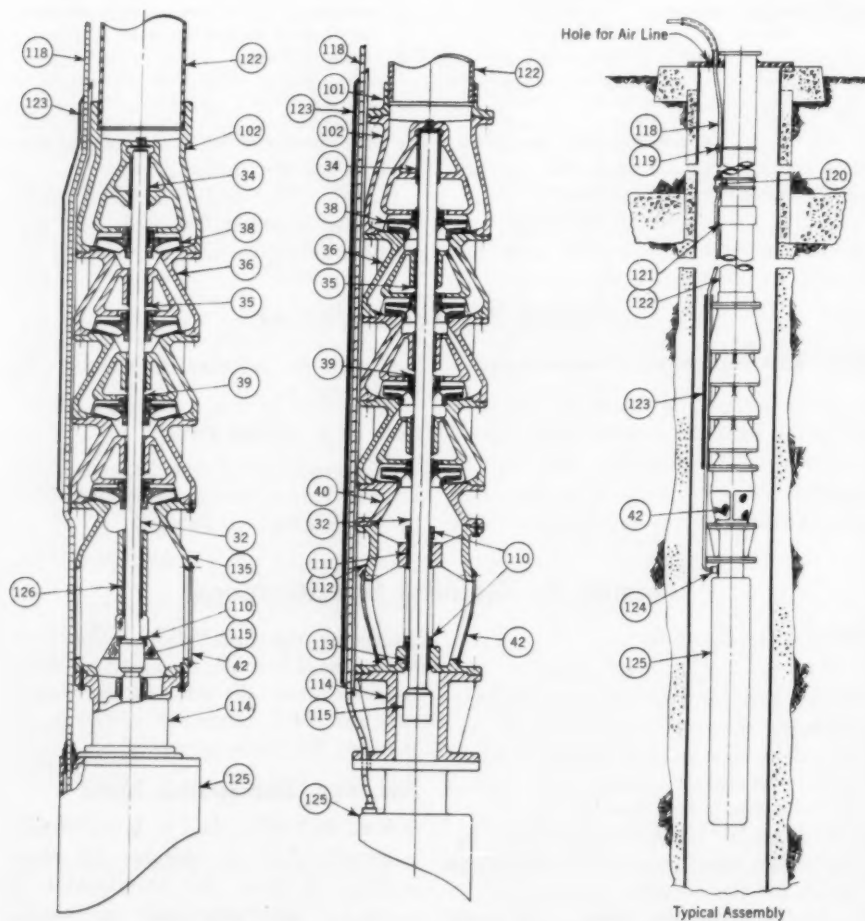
Typical Submersible-Pump Assembly (Bowl Assemblies)
